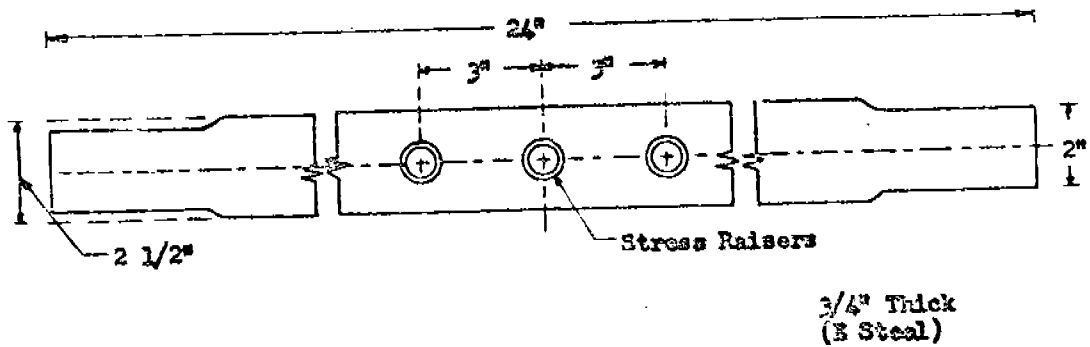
DETAILS OF STRESS RAISERS FOR DETONATOR BOLT SPECIMEN
